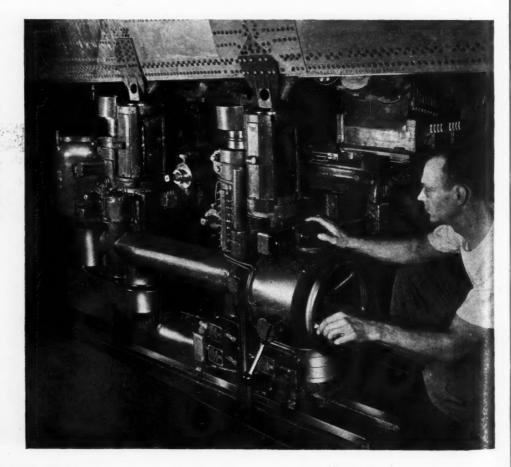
Operating One of the Machine Heads Employed for the Boring and Spot-facing Operations on the Landing Gear Bores
